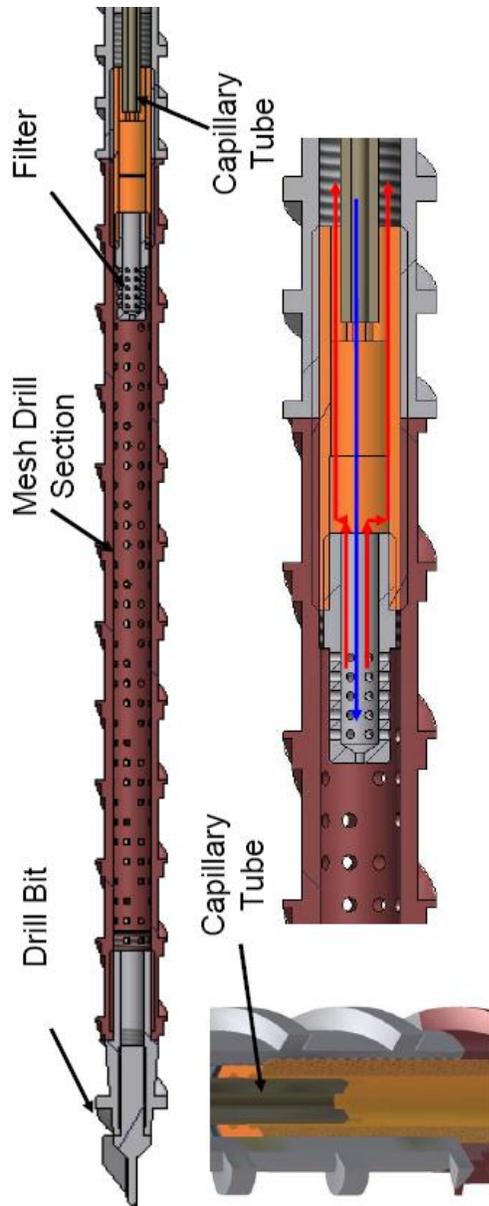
Details of the ‘Sniffing’ part of the drill string.
